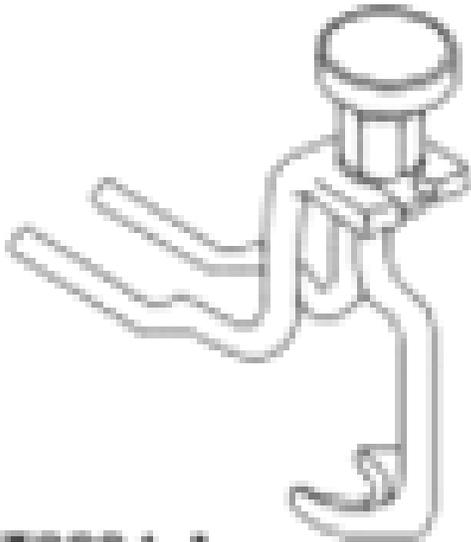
Locating Camshaft Phaser And Sprocket Assembly Bolt
